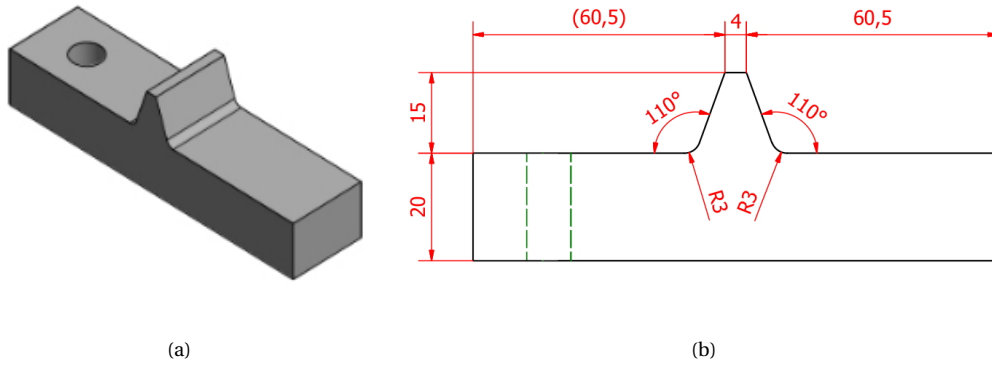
(a) Schematic drawing and (b) dimensions in mm of the single tooth rack test specimen for static testing.
